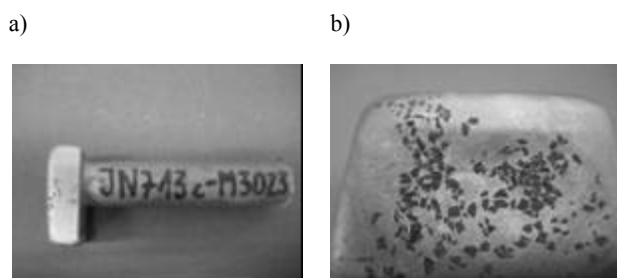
Side and upper surface of test casting made from IN-713C (M3023)
